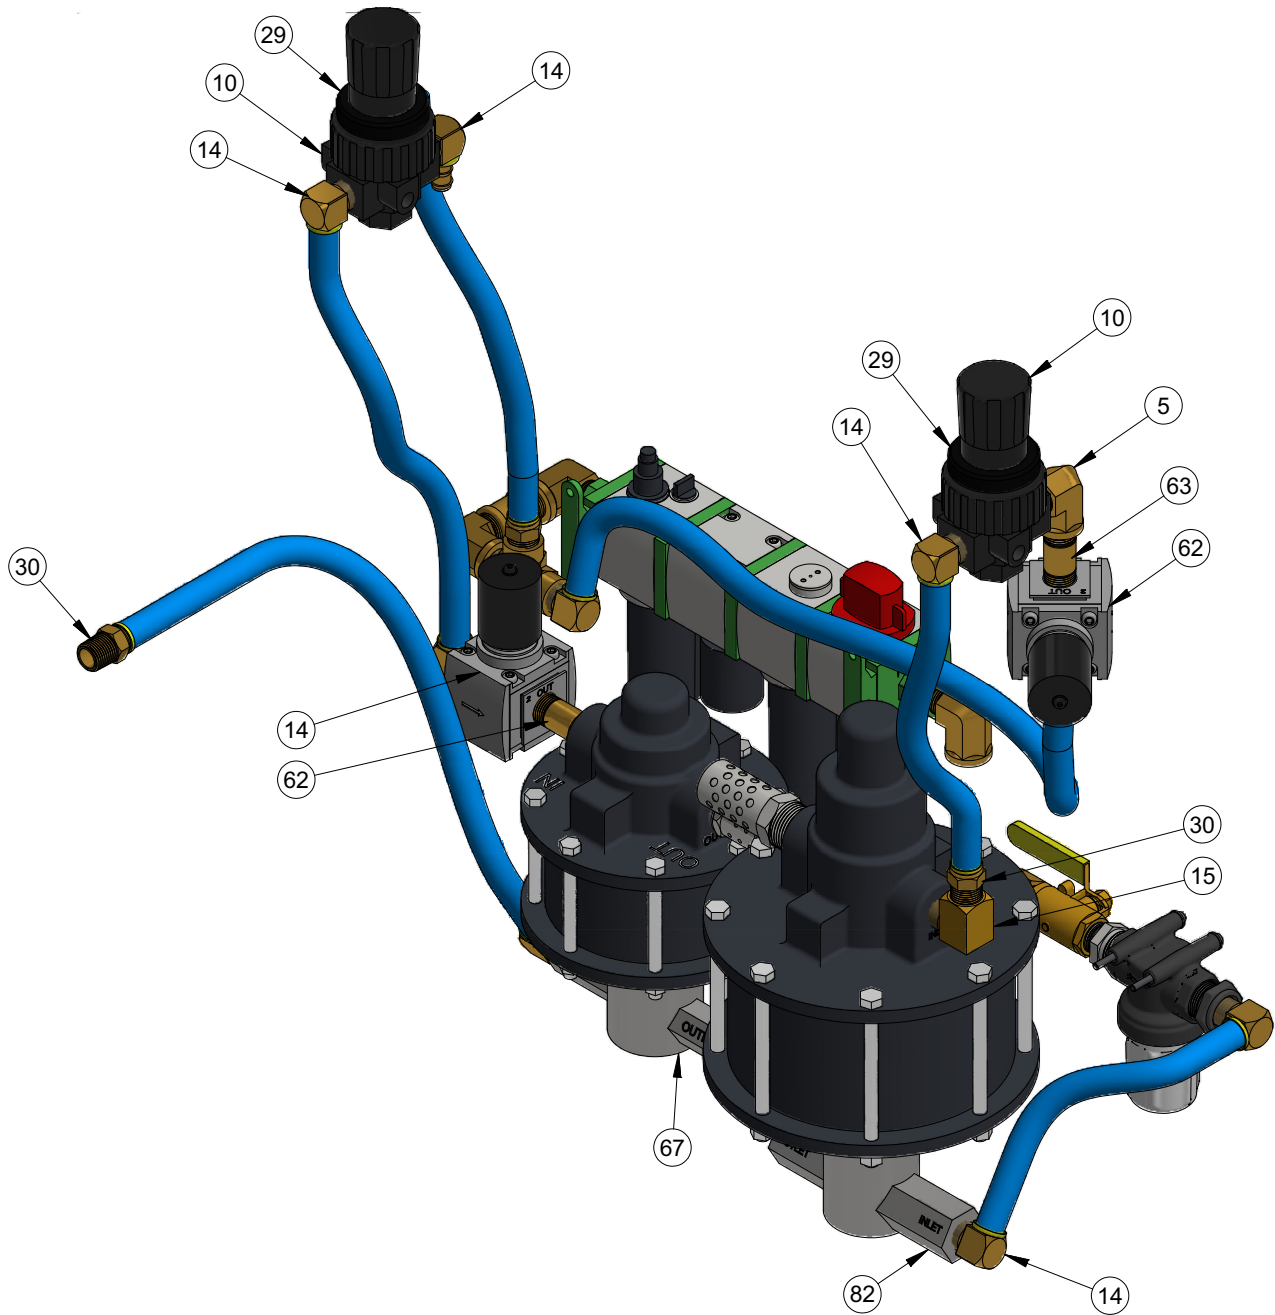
CONSOLE HOSE ASSEMBLY (P/N 97861)
